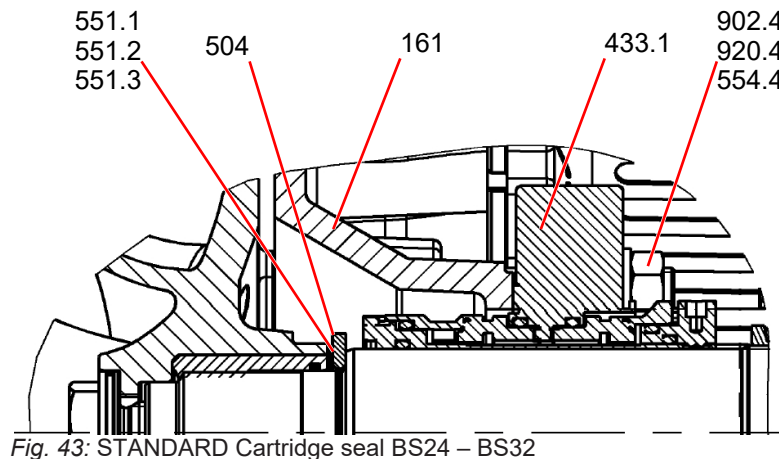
STANDARD Cartridge seal BS24 – BS32
